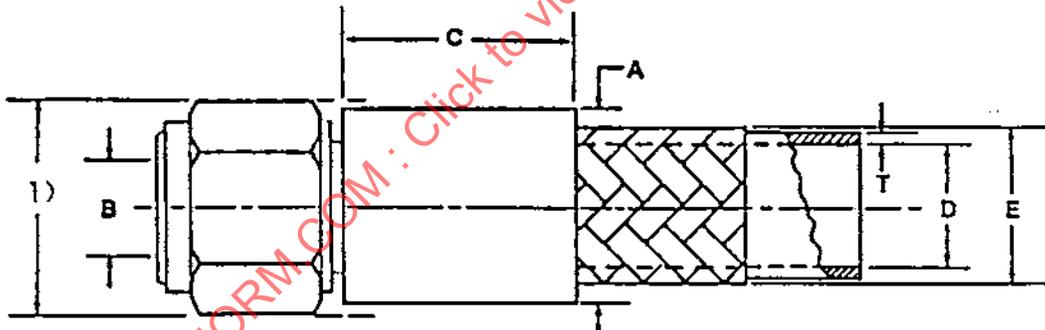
Hose and Fitting Dimensions (Table 1)
